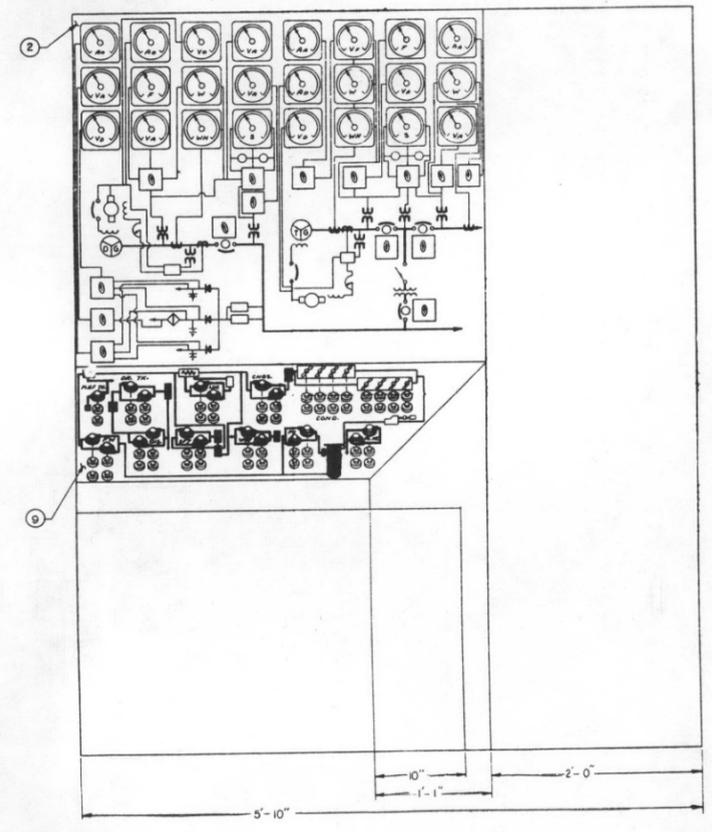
TURBINE GENERATOR SKID MACHINERY ARRANGEMENT
